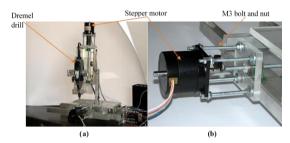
(a) DIY CNC Machine and (b) Motor-Frame Attachment Mechanism
